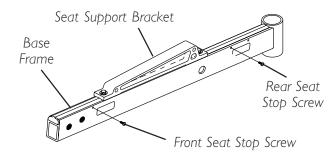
REMOVING/INSTALLING SEAT STOP SCREWS
